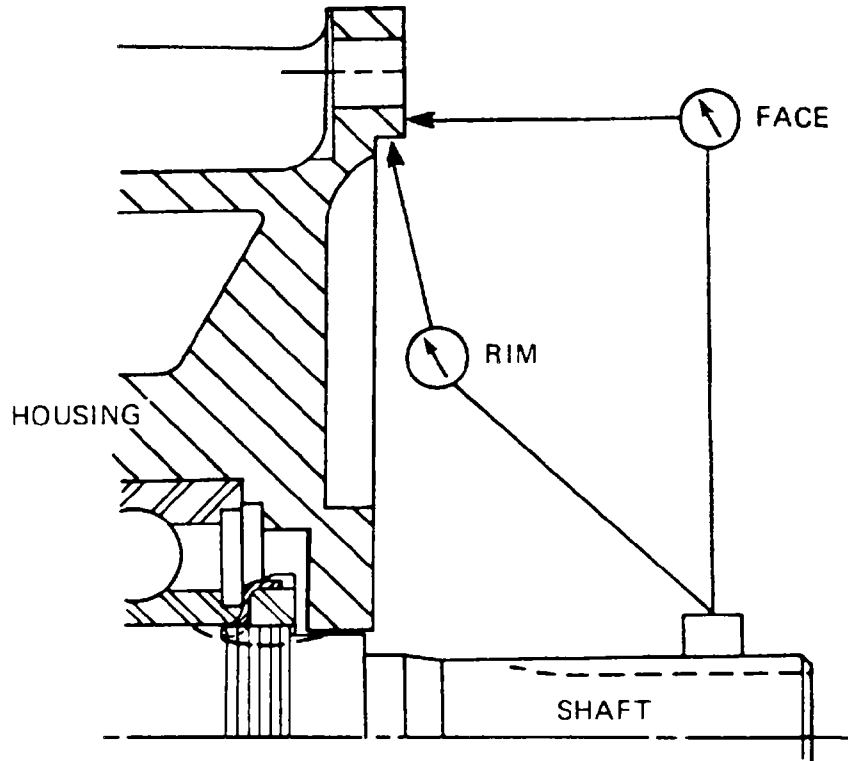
Measurement Location for Determining Face and Rim Runouts
